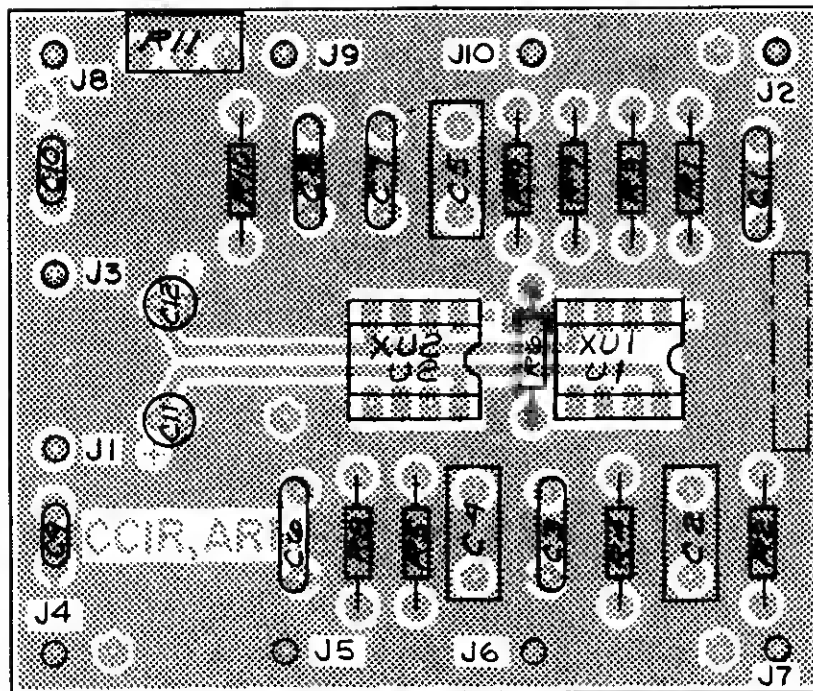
CCIR Board A1A32,A33 Parts Location Diagram
